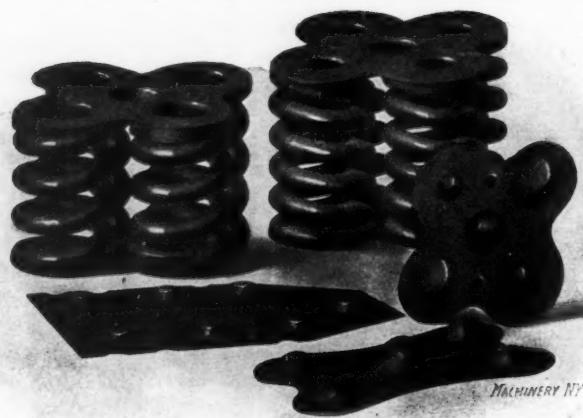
Groups of Coil Springs held together by Plates at Top and Bottom
